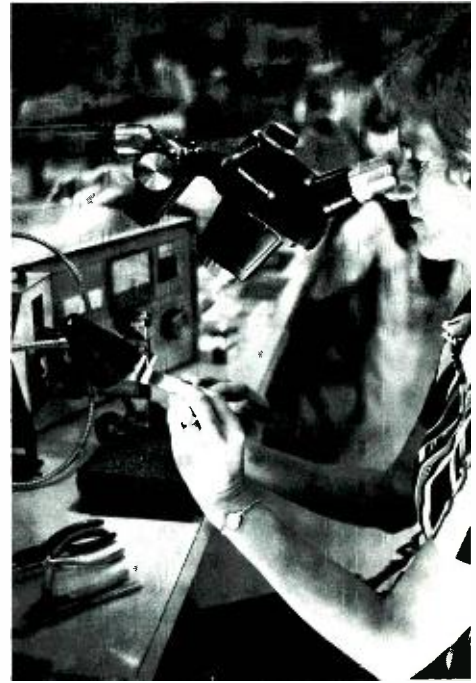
The normal connection to the wafer and pins is made directly to the laminated ribbon strips using the flex-weld process. In this photo, the operator is viewing the weld junction under the scope for centering. The weld tips are heated and forced through the teflon dielectric which is melted at the junction. Pressure is applied and when the proper joint resistance is obtained, the weld energy is released forming the junction.
